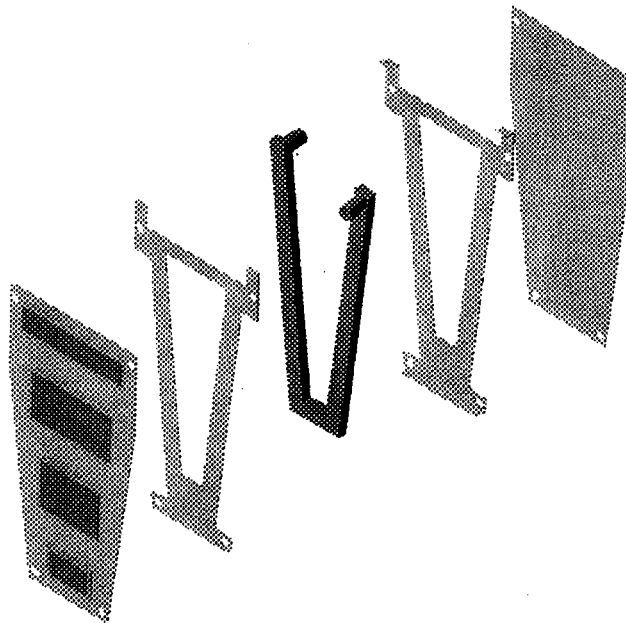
Exploded view of forward pixel blade, with cooling pipe and alignment frame.
